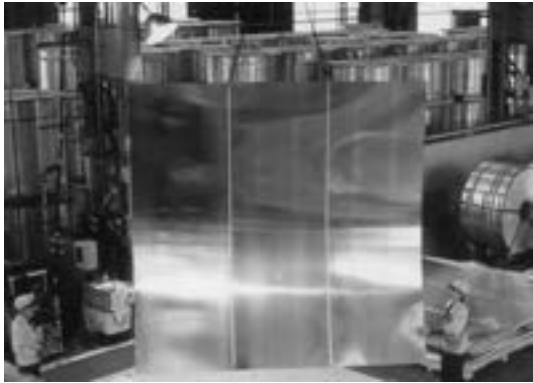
Butt welded 3.3m square panel for parabola antenna.
